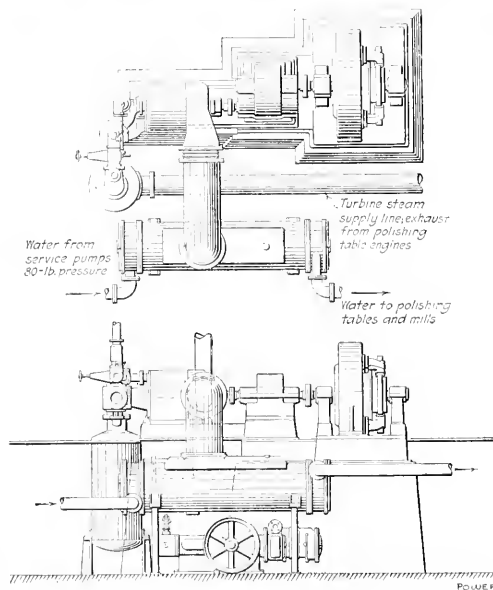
ARRANGEMENT OF THE TURBINE AND CONDENSER
